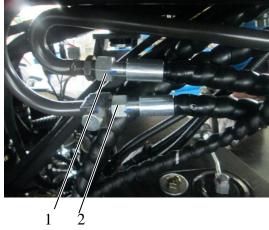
1 Left steering cylinder working rubber hose 1 Right steering cylinder working rubber hose
